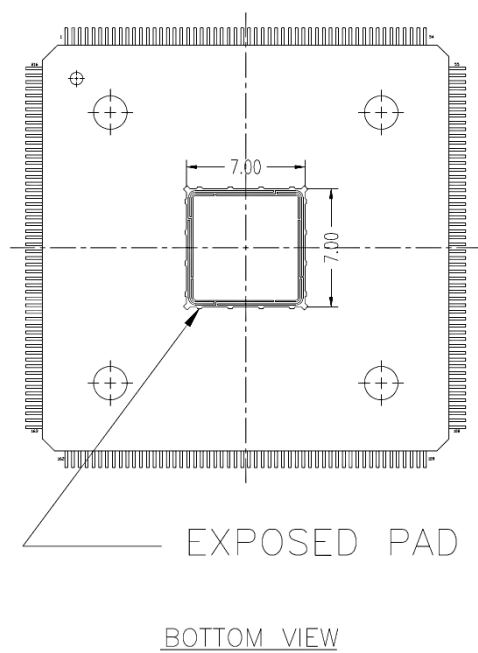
SC1701BH5-200/300 Package (bottom view; dimensions in mm)
